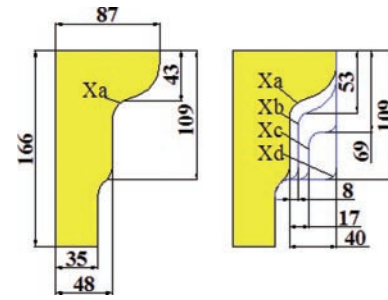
(a) Half geometrical model of shaft, (b) a series of parts constructed to resemble the shaft
